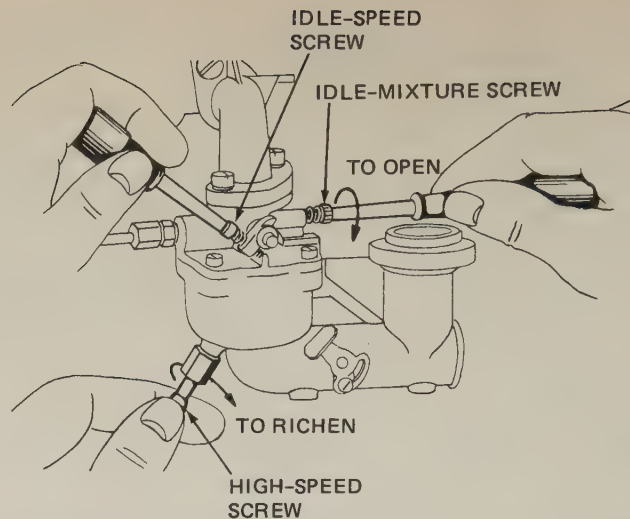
The three adjustment screws on a typical carburetor for a small engine. (Briggs & Stratton Corporation)
